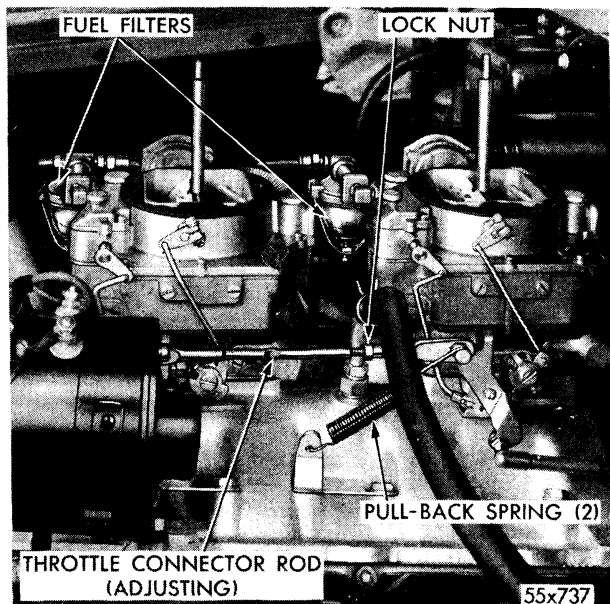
Air Cleaner and Silencer Removed (Carburetors Installed)
